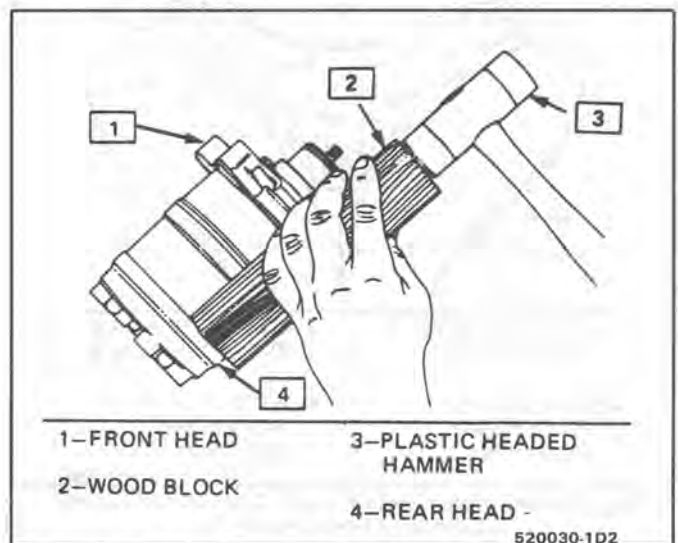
Tapping Front or Rear Head Free of Cylinder
